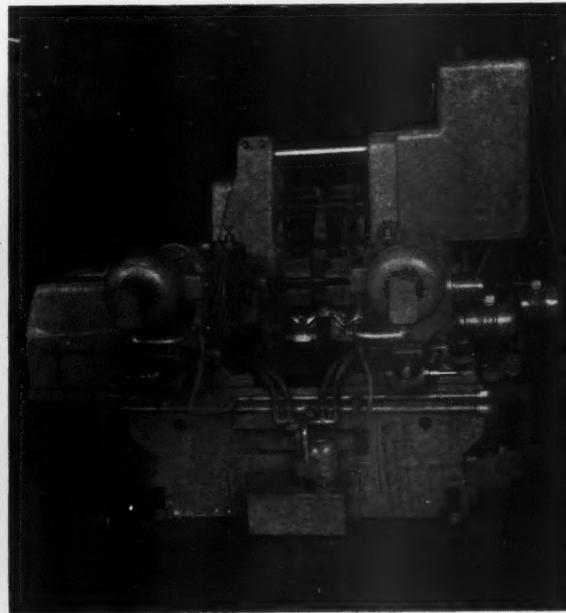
The milling heads on the Adcock and Shipley machine shown in Fig. 16
